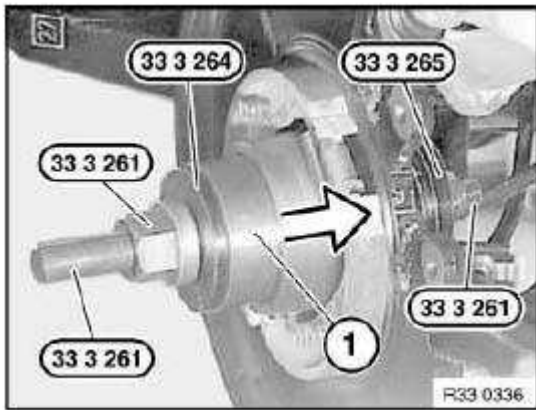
Special Tool (33 3 261), (33 3 264) And (33 3 265)
